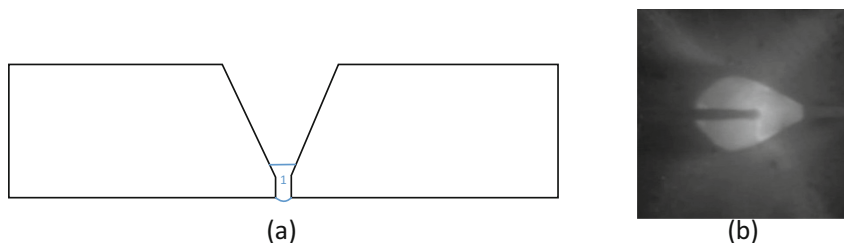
(a) Schematic diagram of weld bead filling. (b) (a) corresponding molten pool image.
